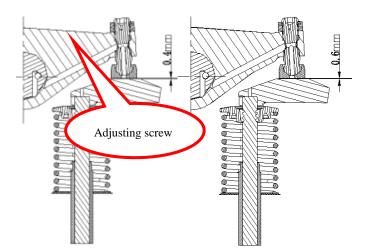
Cold state valve clearance: intake valve, 0.4mm; exhaust valve, 0.6mm
